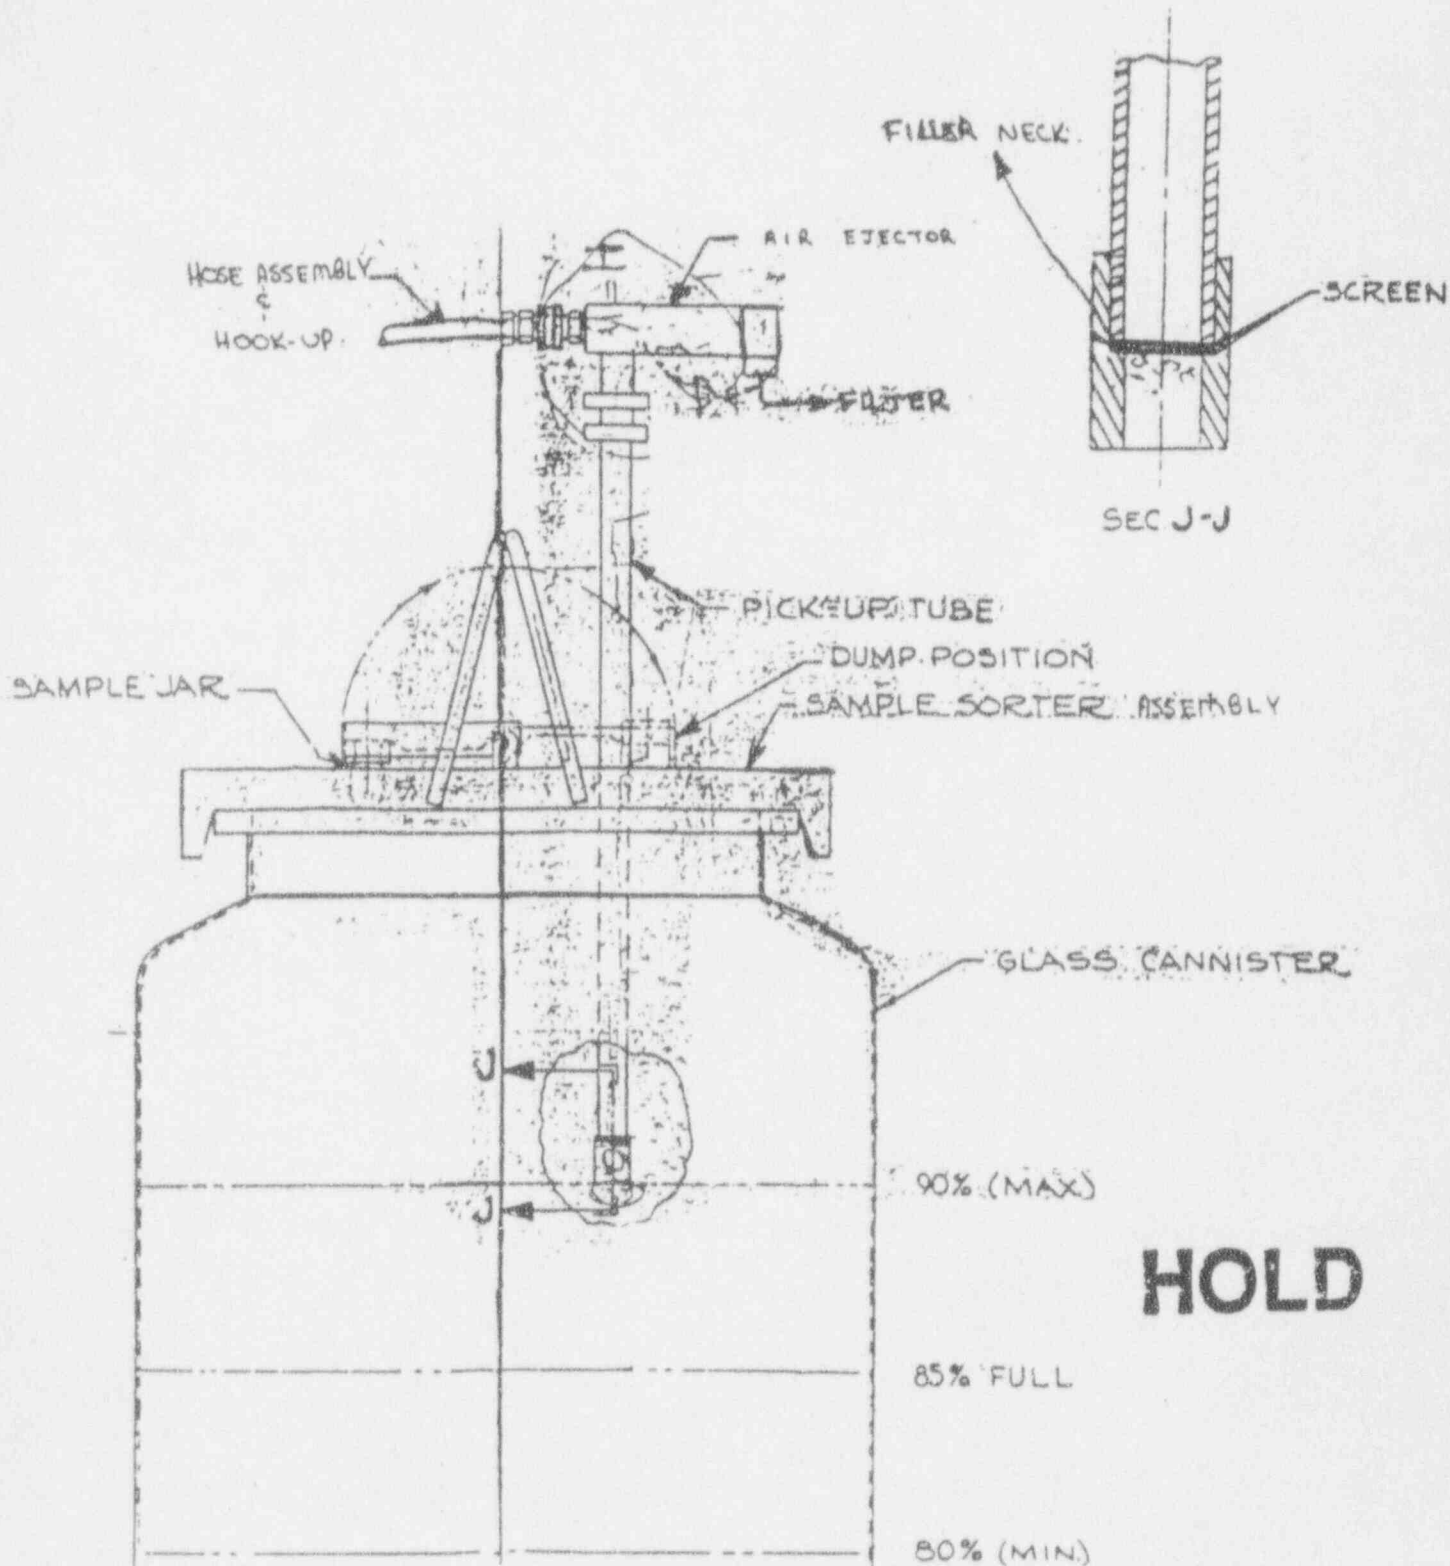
Sample Sorter Assembly and Vacuum Pick-Up Assembly on a Canister (Conceptual Design)
